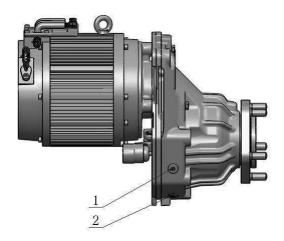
Position of each oil hole 1. Oil filling port of gear box 2. Oil drain hole of Gear box
